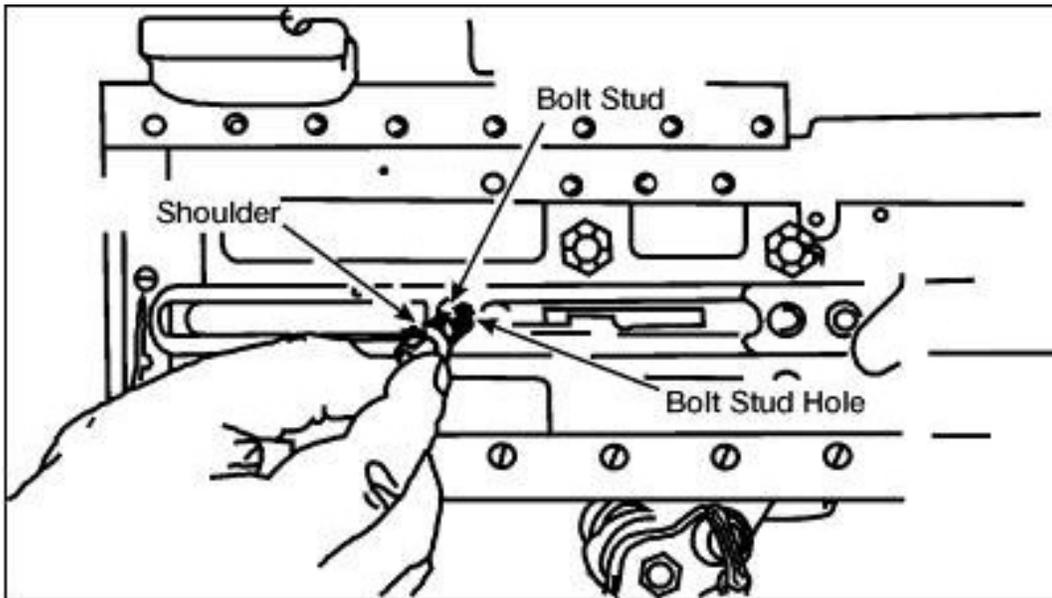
ST-1025_06 (Removal of the bolt stud)
